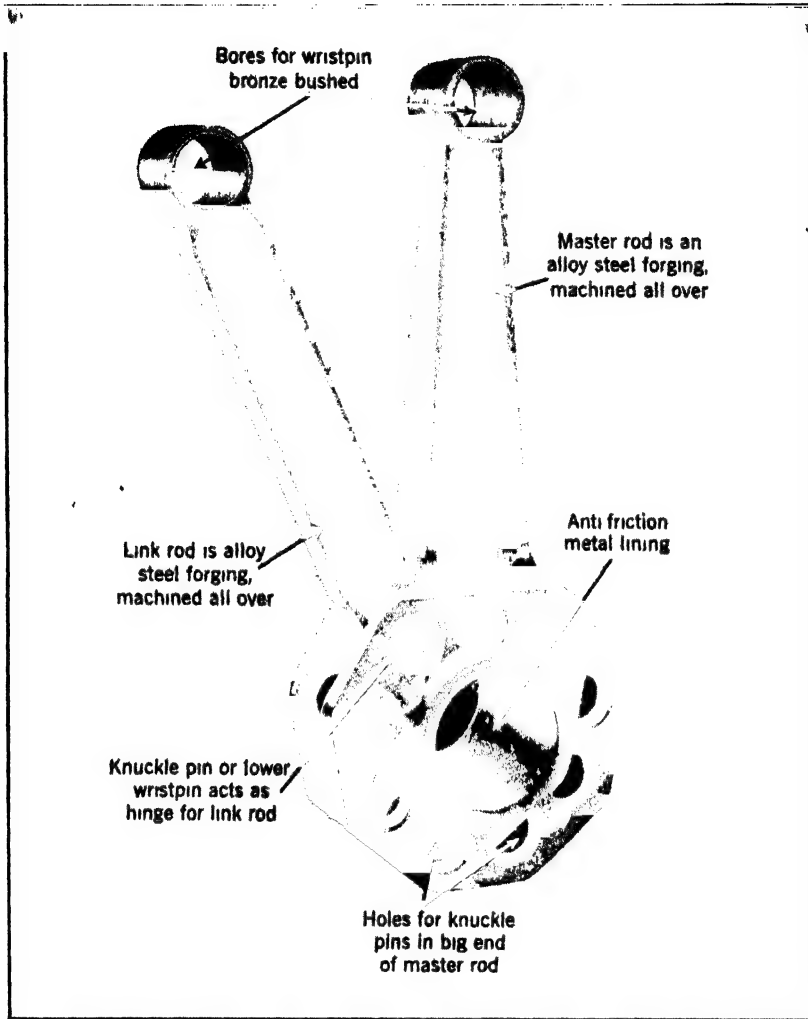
The Unconventional but Substantial and Practical Connecting Rod Assembly Designed for the Packard Twenty-Four-Cylinder X Engine. Note that the Pressure of Four Pistons is Received by One Crankpin Bearing.
